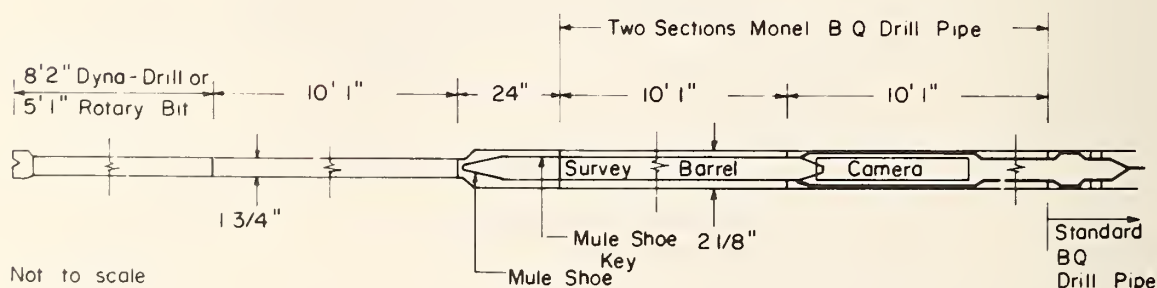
CROSS SECTION OF DRILL ROD NEAR BIT
